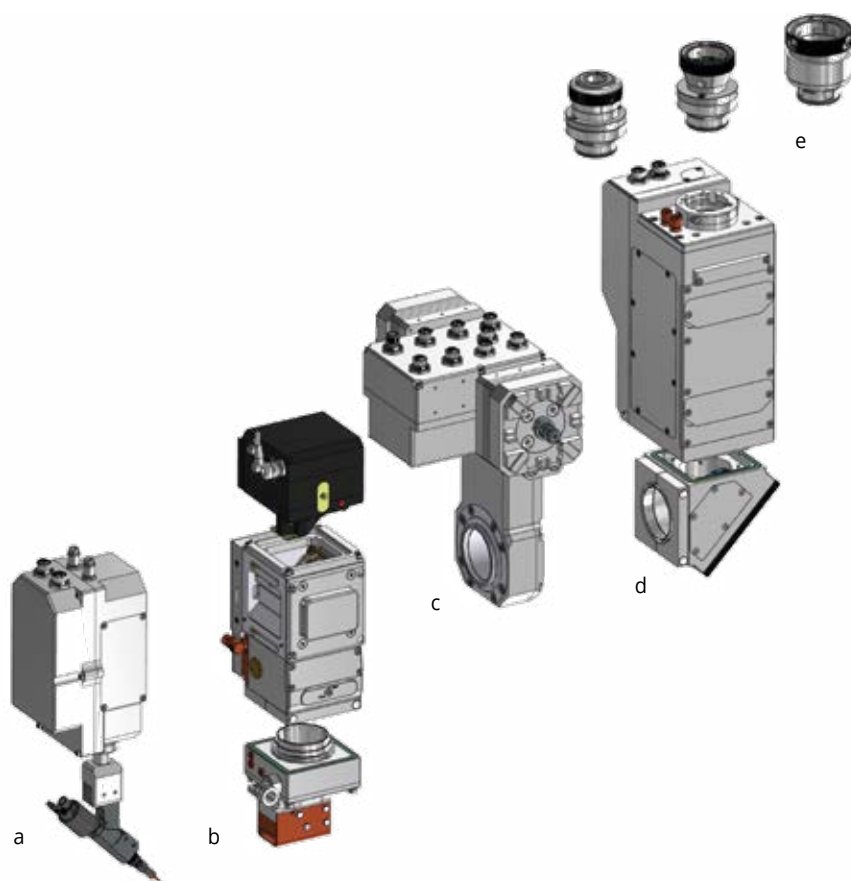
Modules within the laser head: (a) motorized tactile sensor arm with force measurement, (b) camera viewing (top), focusing module (mid), crossjet (bottom), (c) rotary drive unit with central control access, (d) motorized collimation module, (e) a choice of fiber connectors
